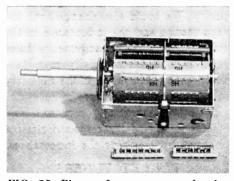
Photo of turret tuner showing drum mounted in place and one set of strips removed.
